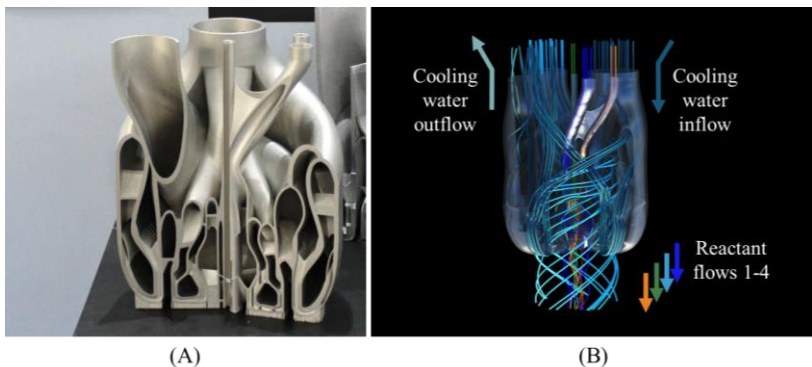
(A) Complex burner nozzle fabricated using AM (developed by Siemens AG Technology); (B) Visualization of different fluid flows guided inside the nozzle.
